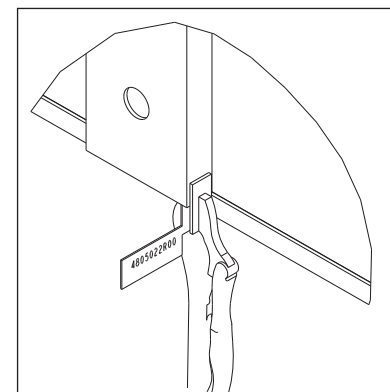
Slide Jigs into Bottom of Mounting Tubes
